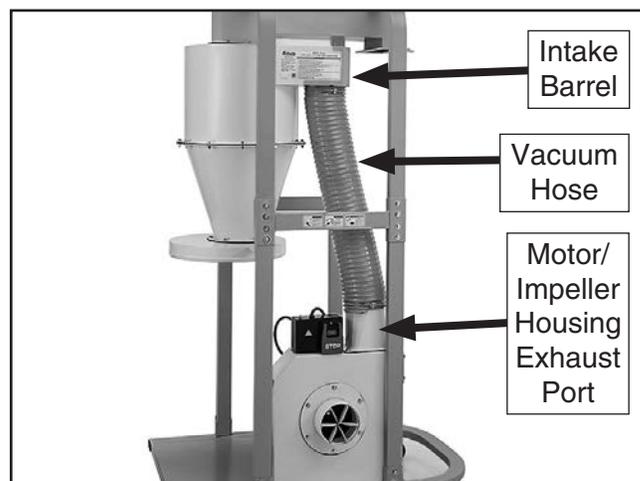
6" vacuum hose attached to intake barrel and impeller housing exhaust port.
